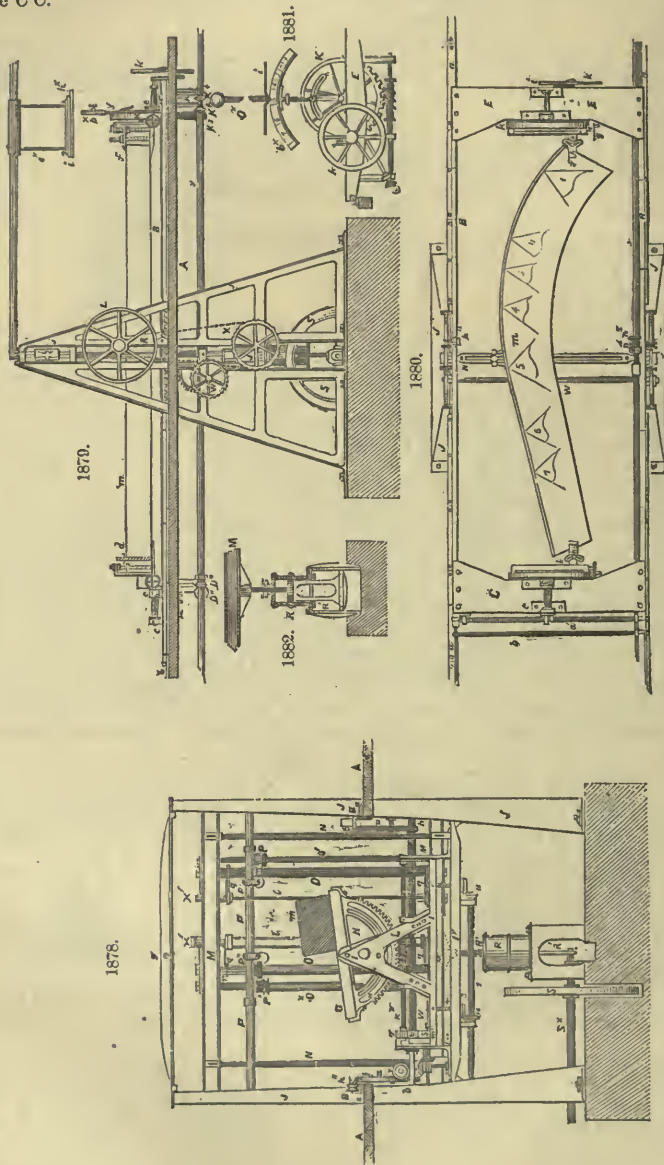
is a front or end elevation of the machine. Fig. 1879 is a side elevation. Fig. 1880 a plan. Fig. 1881 is a transverse section through the chuck-plate wheel; and Fig. 1882 is a detached view of part of the steam machinery.
